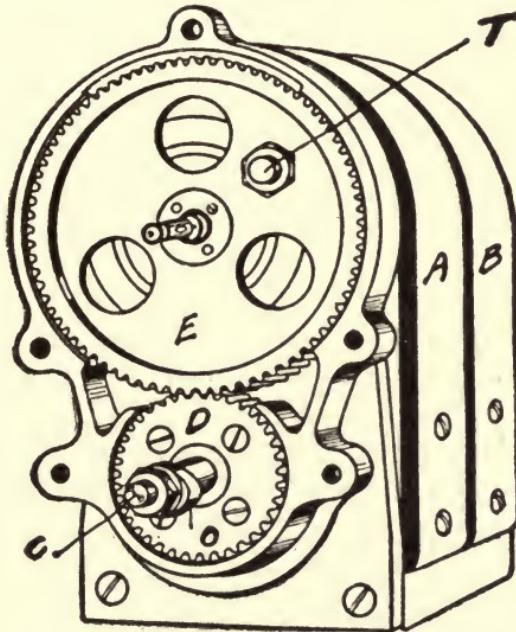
THE GEAR WHEELS WHICH OPERATE THE HIGH TENSION DISTRIBUTER.
